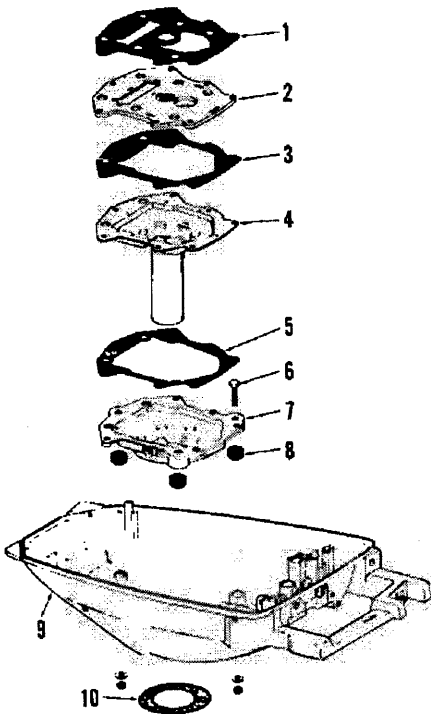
View of engine adapter plate and exhaust separator.
